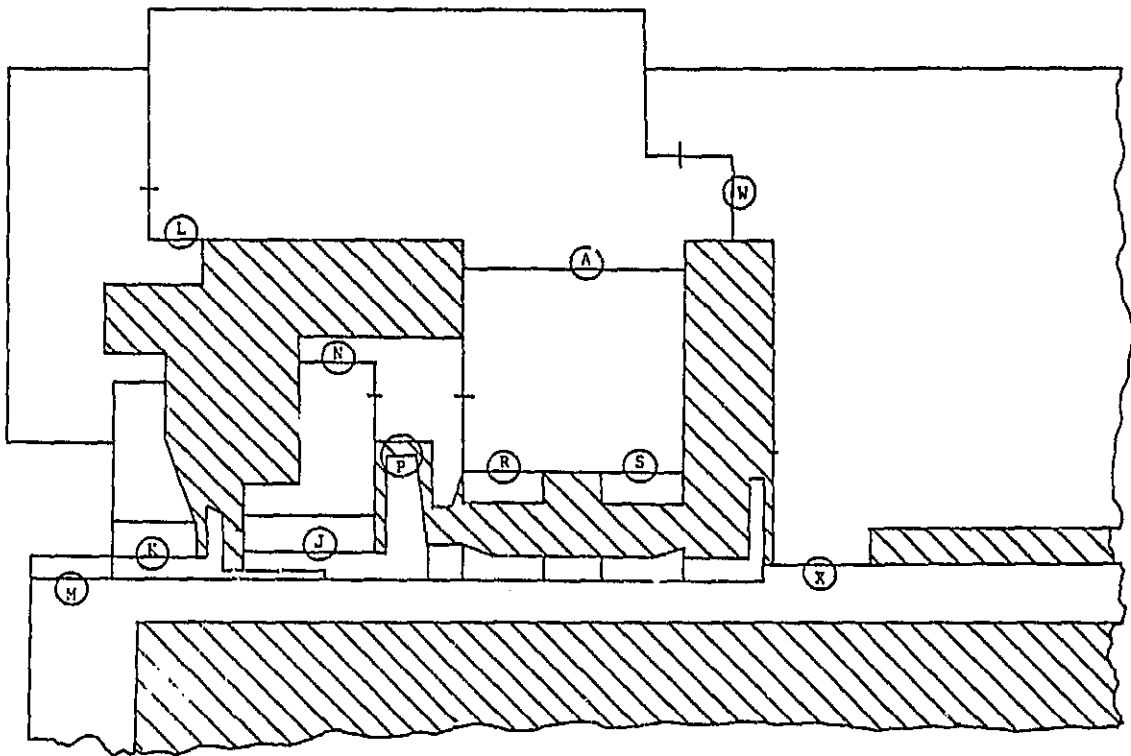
Bearing Tester Interface Locations (Drive Side)
